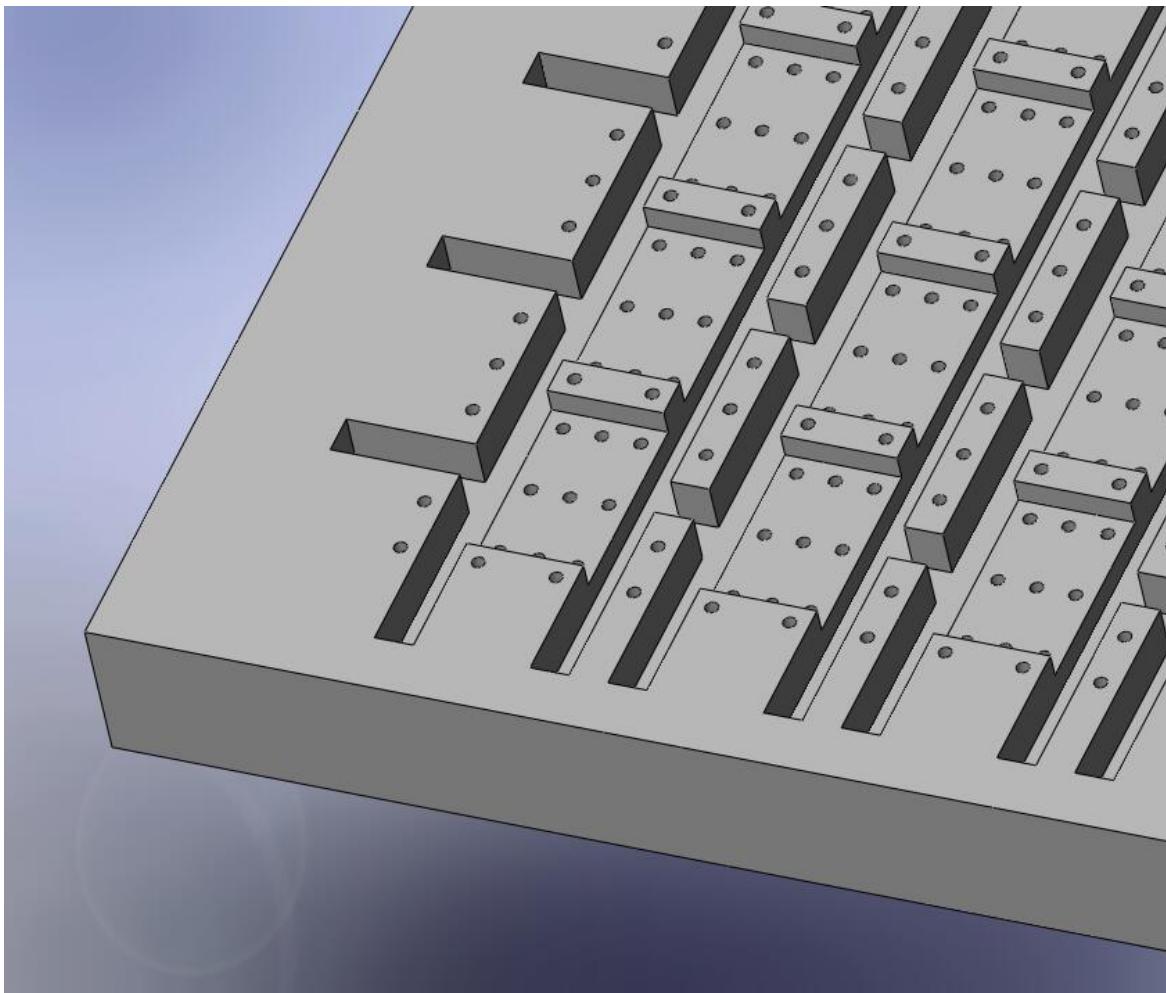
Zoom in 3D view of the motherboard. Each groove is 2mm deep and 1.5mm wide. The dimensions of the rectangular depression are 4.5mm (width) \times 7.5mm (length) \times 1mm (depth) and 9mm apart center to center. The through holes are 1mm in diameter and have no function in this study.
